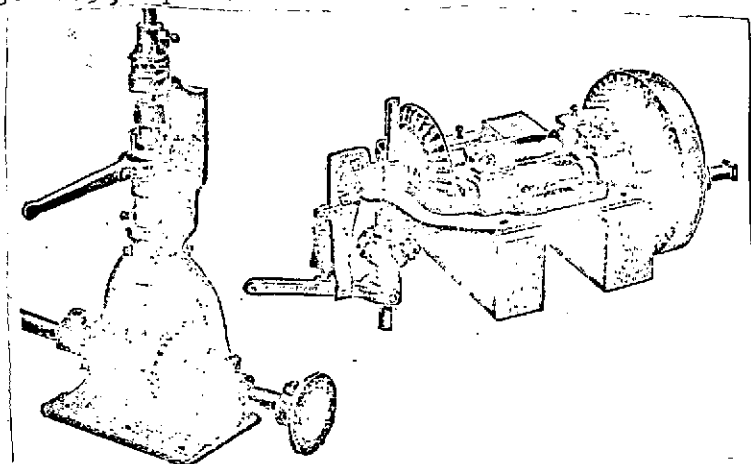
Gearing for base of pylon (Durey-Sohey).
